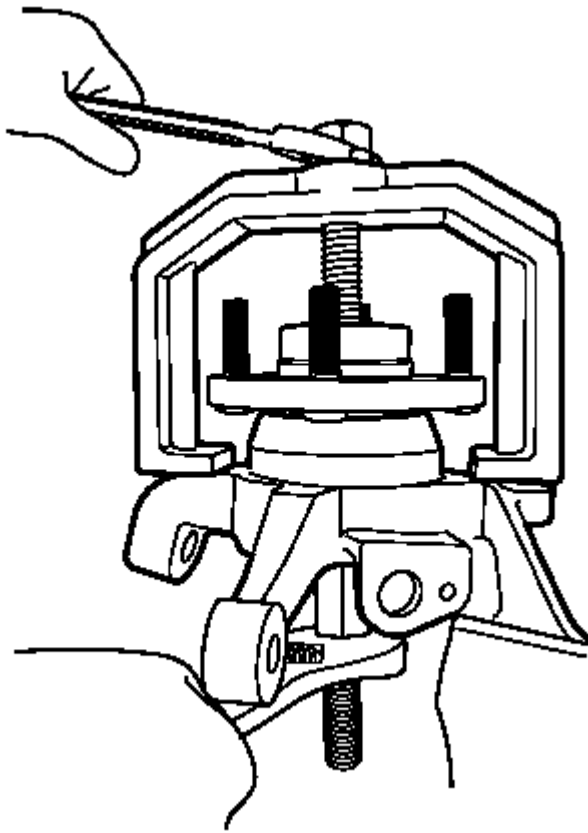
Removing Wheel Hub From Steering Knuckle Using Tools
